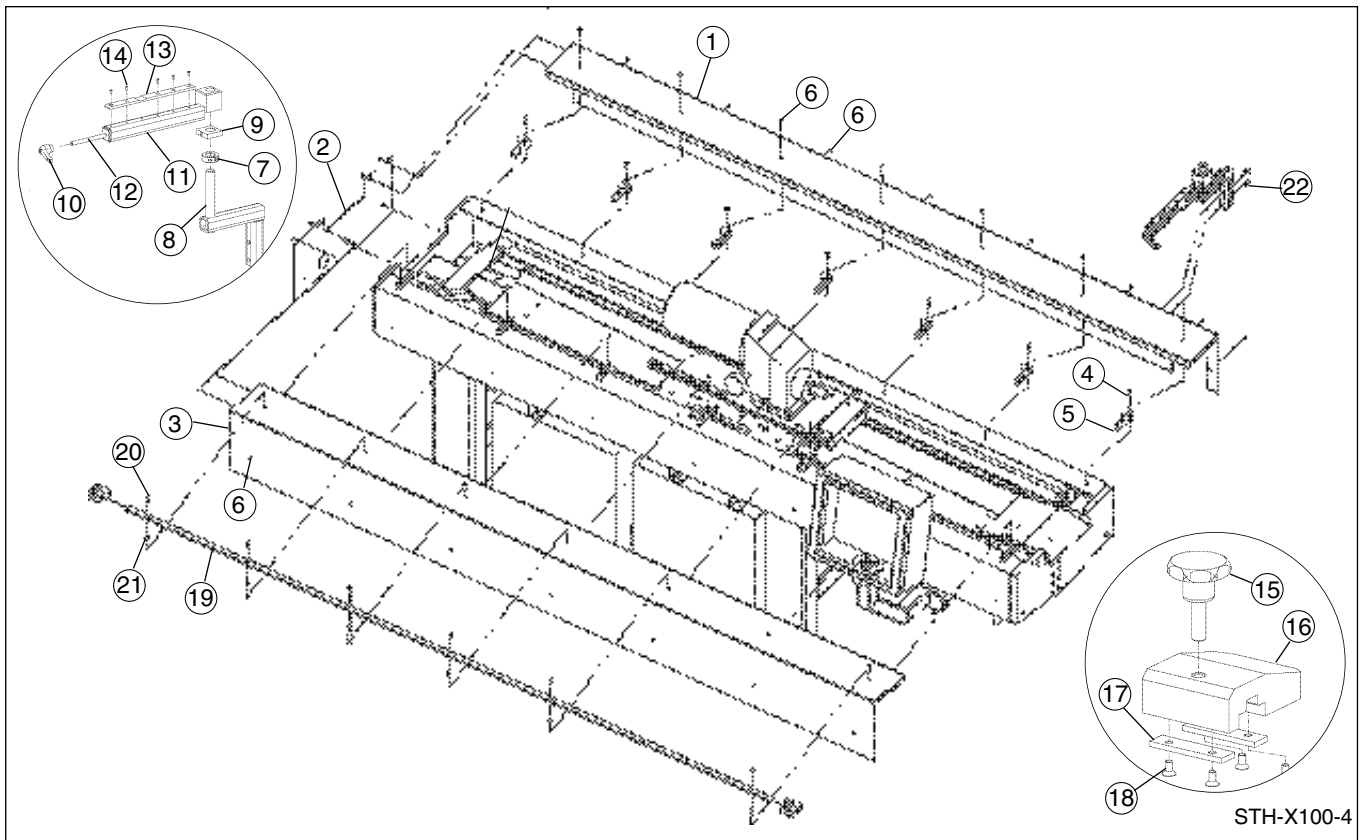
FIGURE A - TUBE HONE MACHINE BASE ASSEMBLY (4 of 8)
